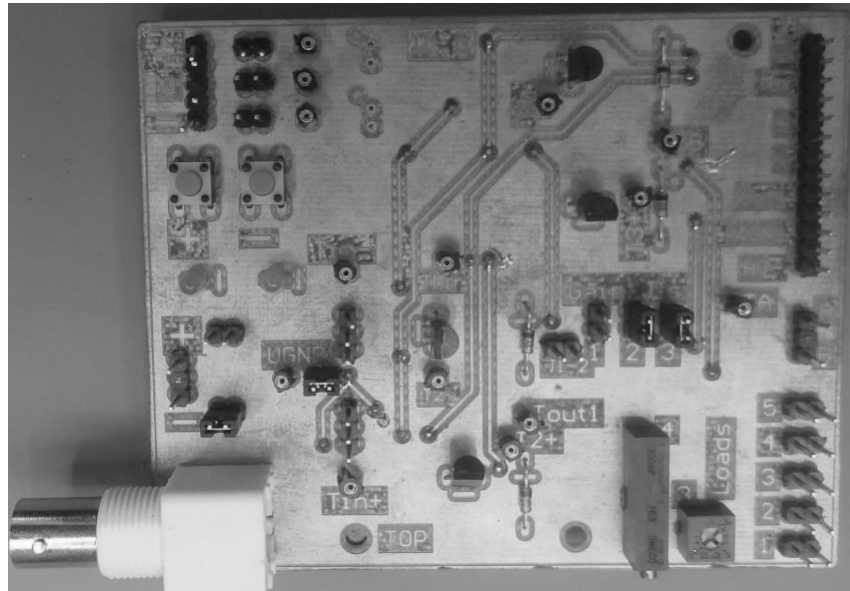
Photo of the HVCP prototype PCB. Limited surface mount components are on the underside of the PCB.
